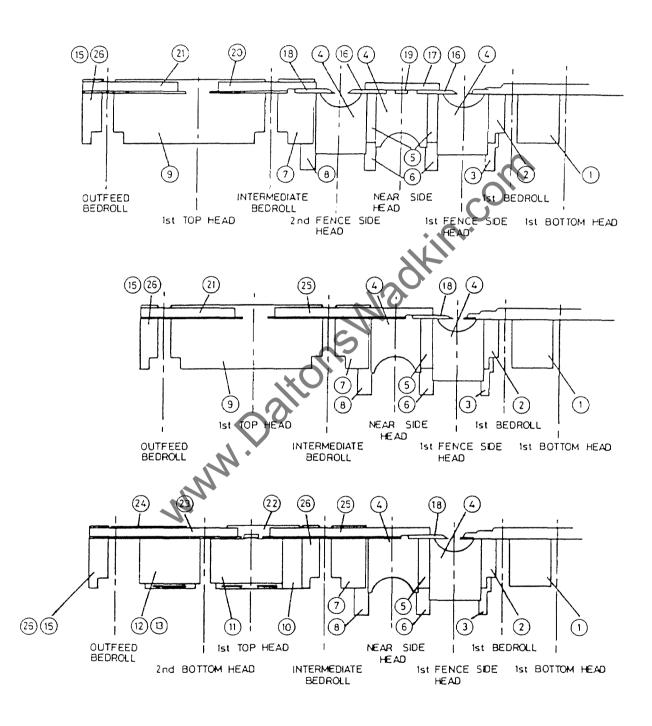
A BEDPLATES FENCES AND SIDE GUIDE
